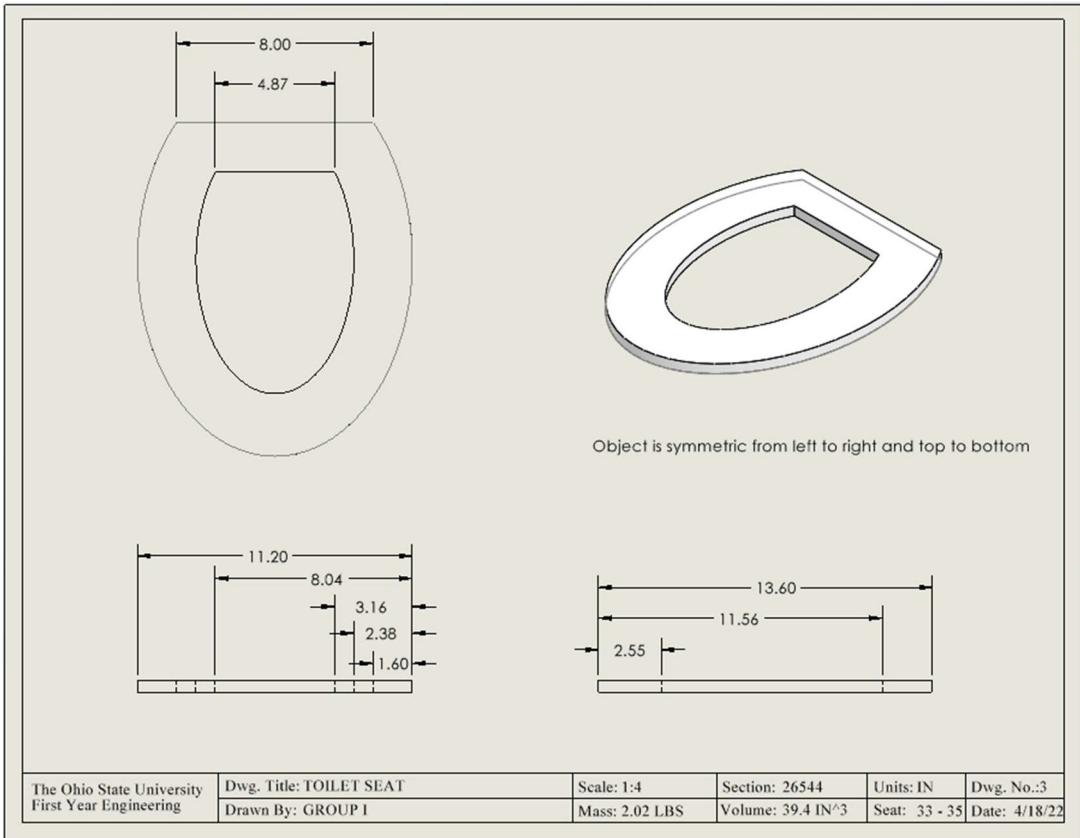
This is the drawing of the toilet seat that will be used to test if the light properly covers it.
